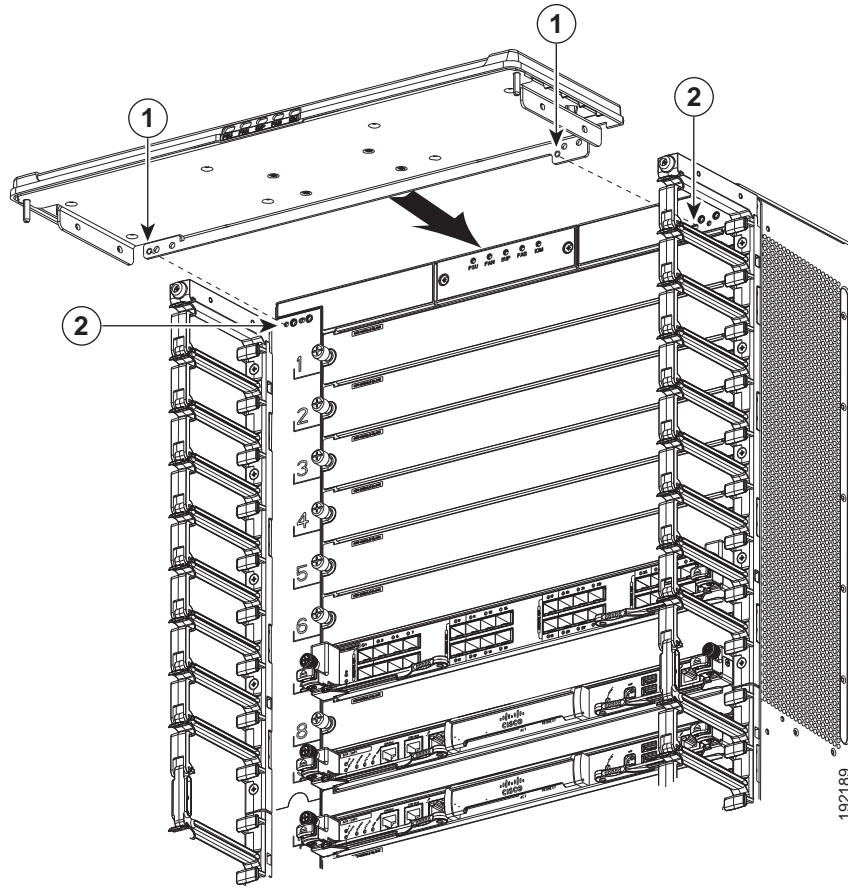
Cable Management Assemblies Attached to the Rack-Mount Brackets
